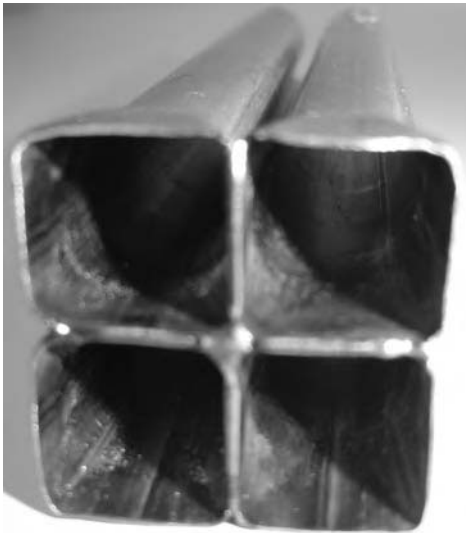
Edge joints in thin type 304 stainless steel tubes. Courtesy of Edison Welding Institute
